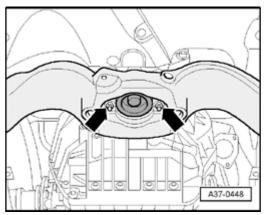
Removing Bolts & Slowly Release Rear Crossmember Using VAG1383A Engine/Transmission Jack
